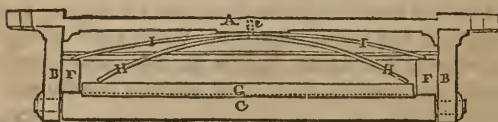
, in the drawing, is a perpendicular view of the machine in its place, as fitted for operation. Fig. 2, is a view of the back side of it. Fig. 3, is a section cut from front to rear at the place marked *f, f*, Fig. 1.
